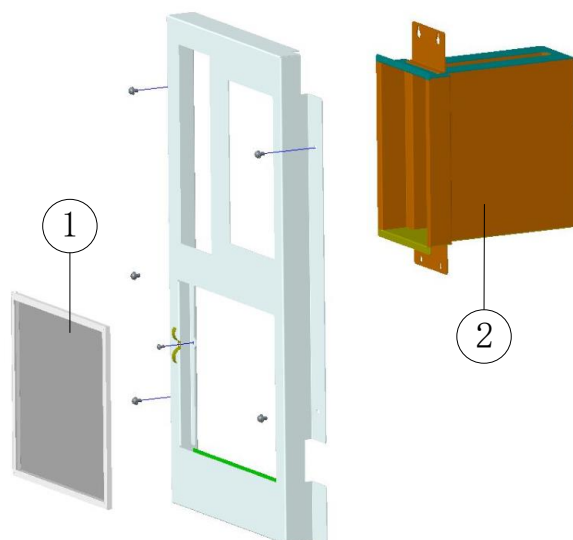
Exploded view of right front board assembly (Medica ISE configured)
